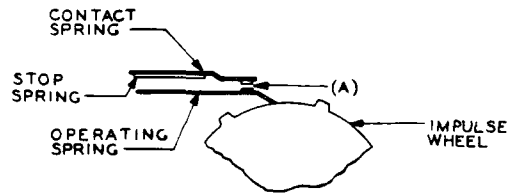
Spring Tension - Keys Not Equipped With Auxiliary Operating Spring
